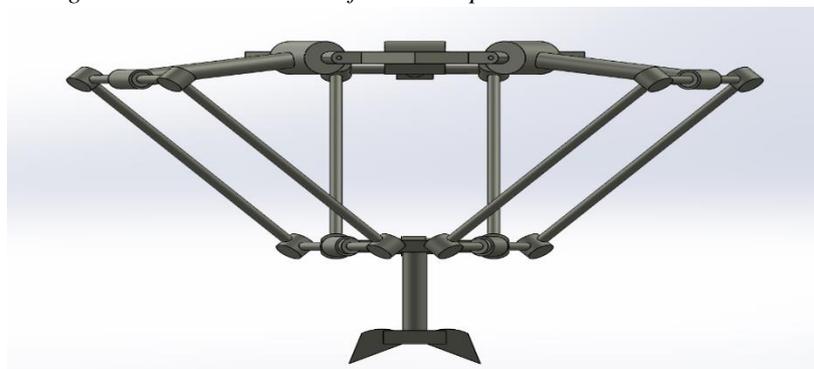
Front view of the Delta parallel Robot in SolidWorks
